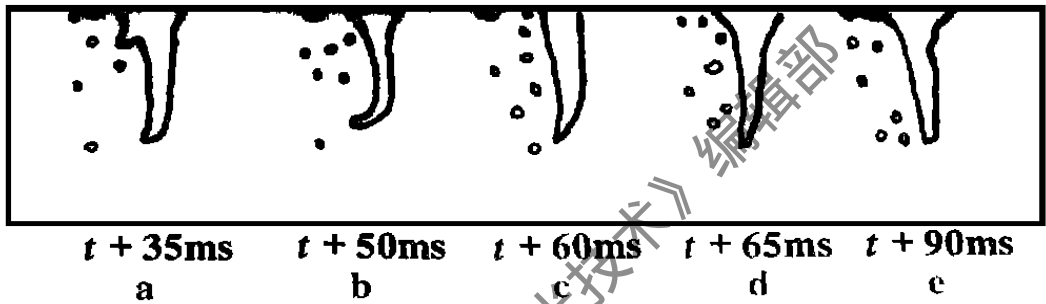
Schematic of keyhole motion and porosity formation process observed in CO₂ laser welding of low carbon steel
